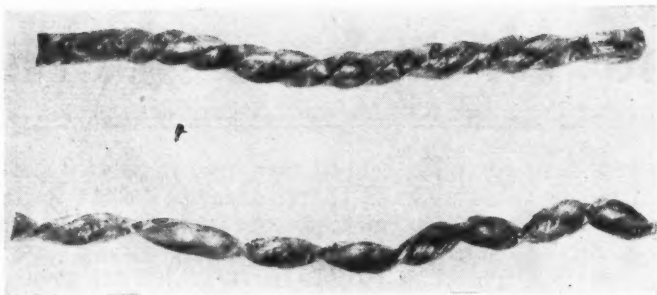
Plate welds twisted through 1080 degrees to show the ductility of electronic tornado welds
